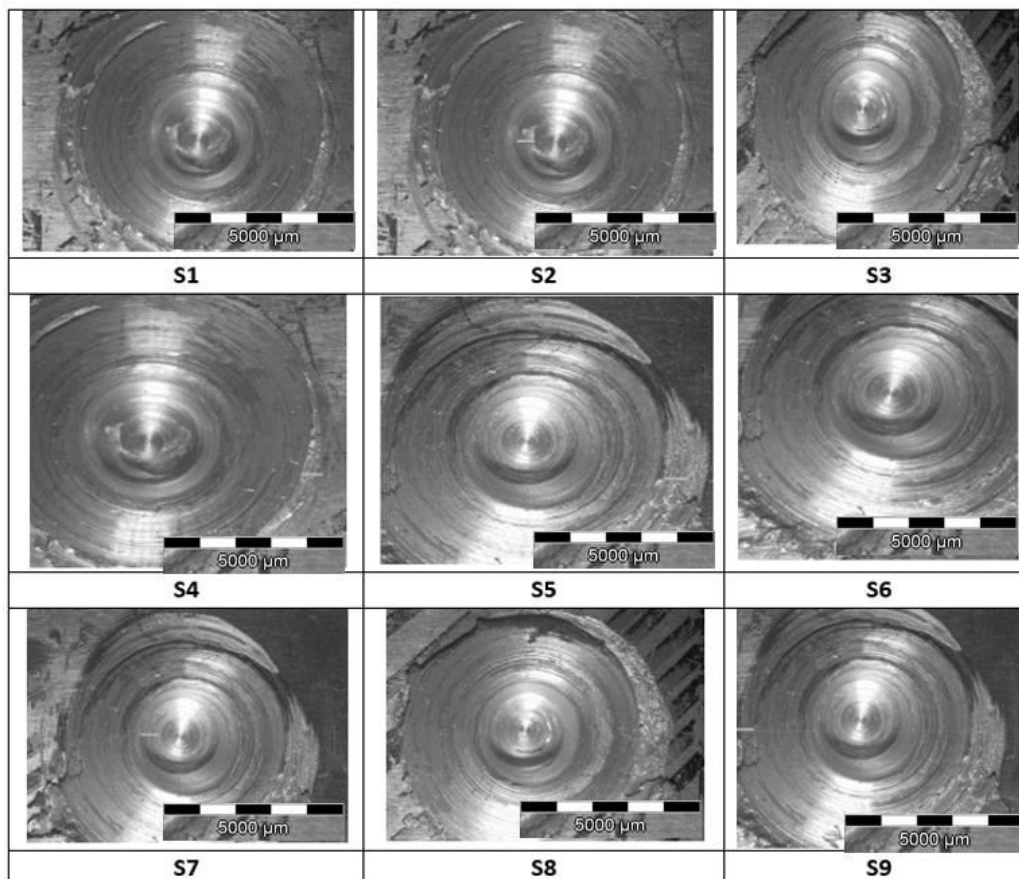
Macrographs of the FSSW showing the top view of the weld zone.
